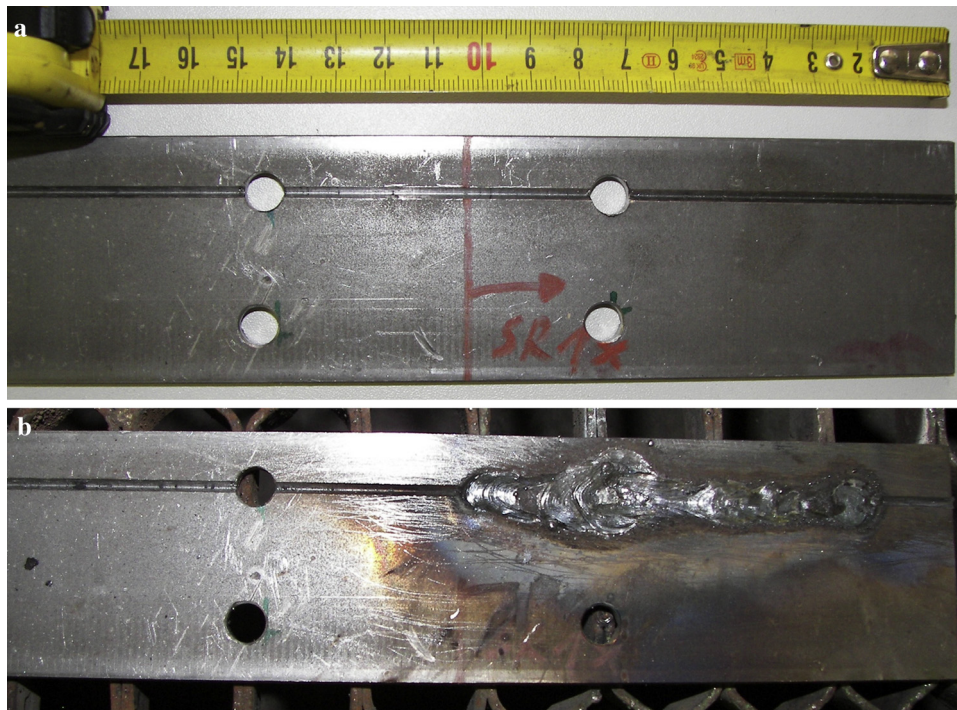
Test part with simulated irregularities (holes) in the groove before welding (a) and after the welding (b).
